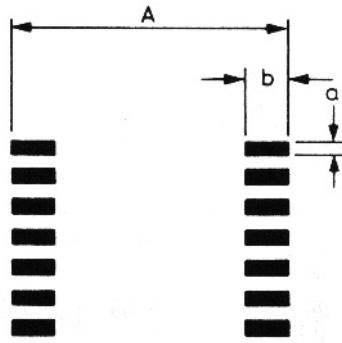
Solder land dimensions for SO and VSO packages, please refer to Table 6.3.
